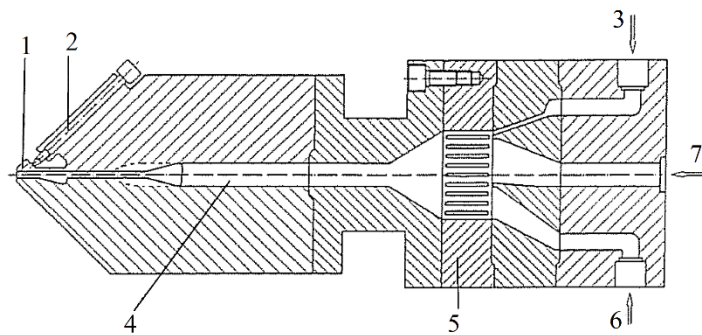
Fixed adaptor feed block die for flat sheets extrusion
